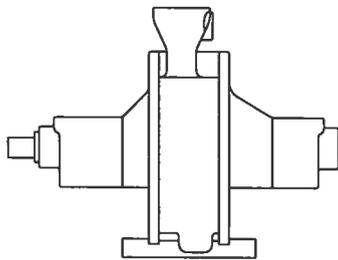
Pump type RT4: Between-bearing, flexibly coupled, peripheral design
